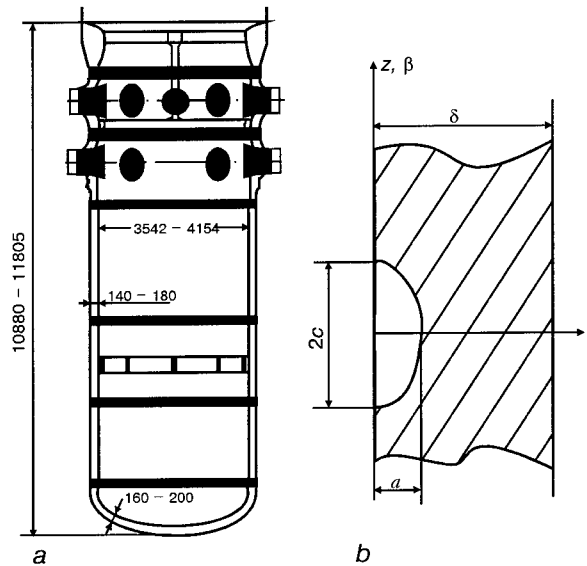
Scheme of location of welded joints in the WWER type reactor vessel (a) and a postulated crack (b): $a = 0.25\delta$; $2c = 3.0a$
